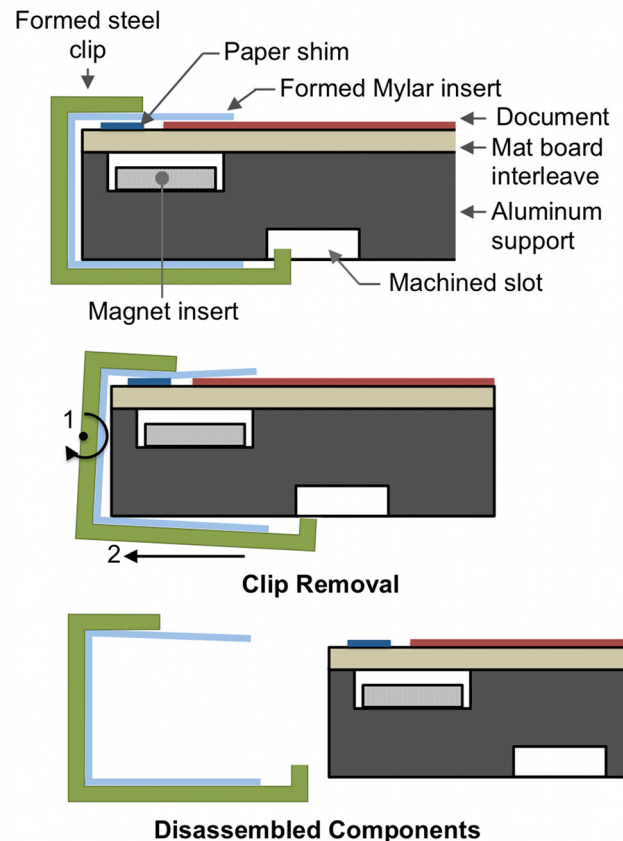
Cross-section illustration of the clip design used to secure the documents to the support plates.
